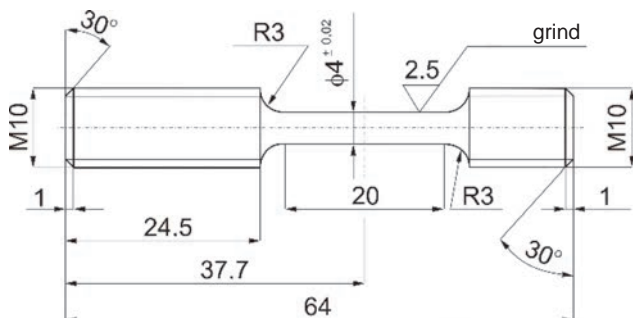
Smooth cylindrical specimen used in the dynamic tensile test
